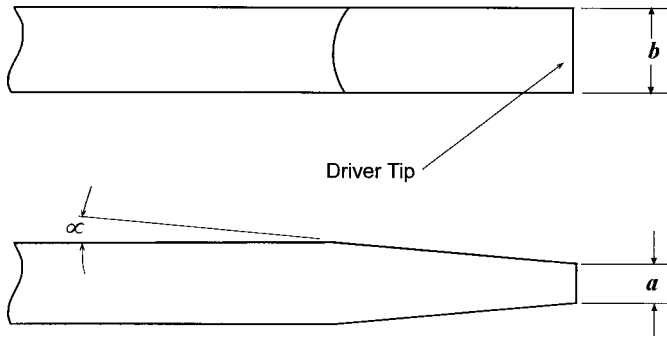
Dimensions of Single-Slot Screwdriver Bit
